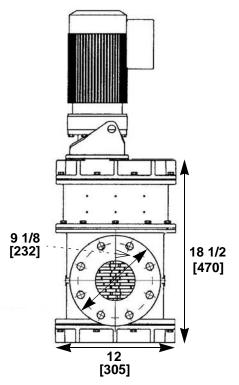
MUFFIN MONSTER 10000 6" FLANGE DIMENSIONS - B
